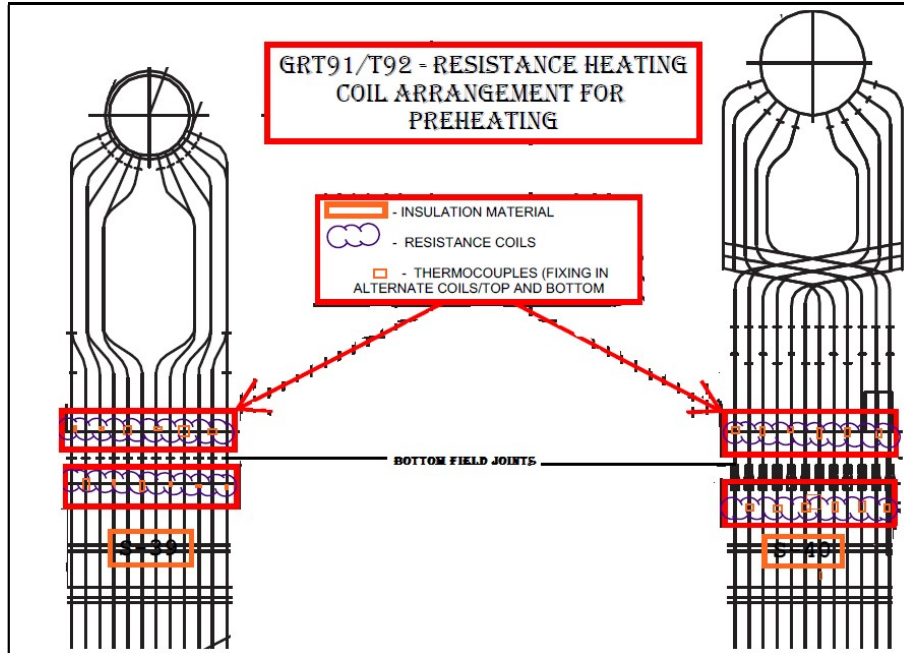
Resistance heating Coil arrangement for Preheating of T91/T92 tube assembly
